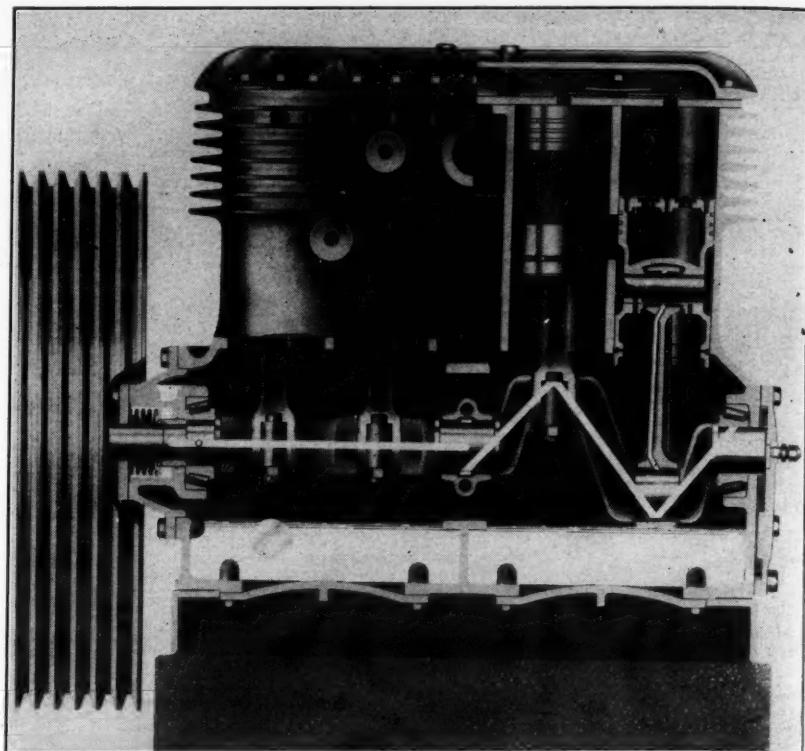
The Baker Freon compressor showing oil level in the crankcase, path of oil flow (by white lines) through crankshaft and connecting rods; and the application of roller bearings at the outboard ends.
